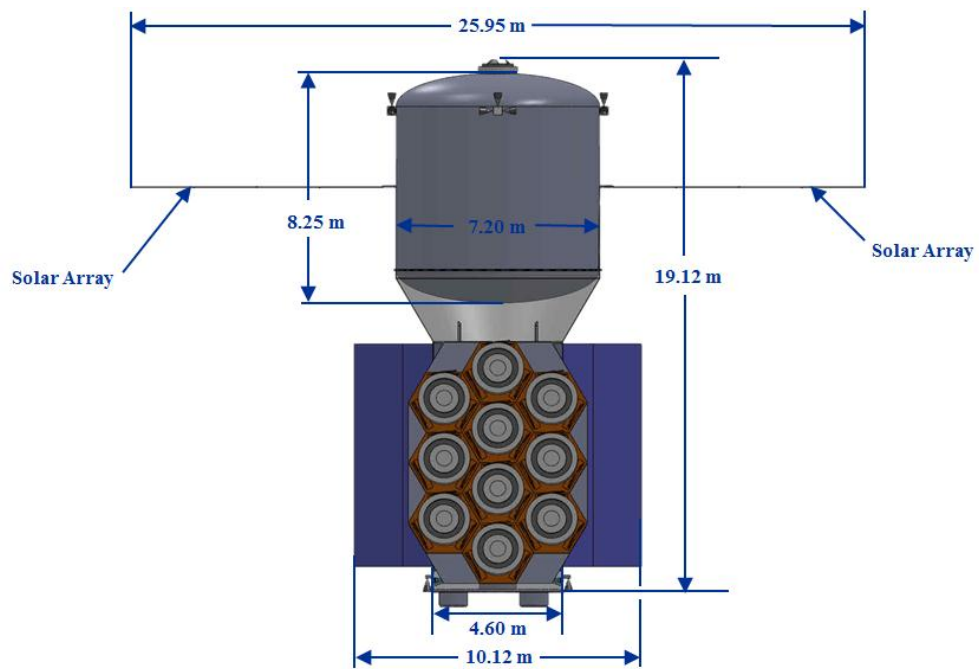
Dimensions of the fully deployed Hab/EP element.
